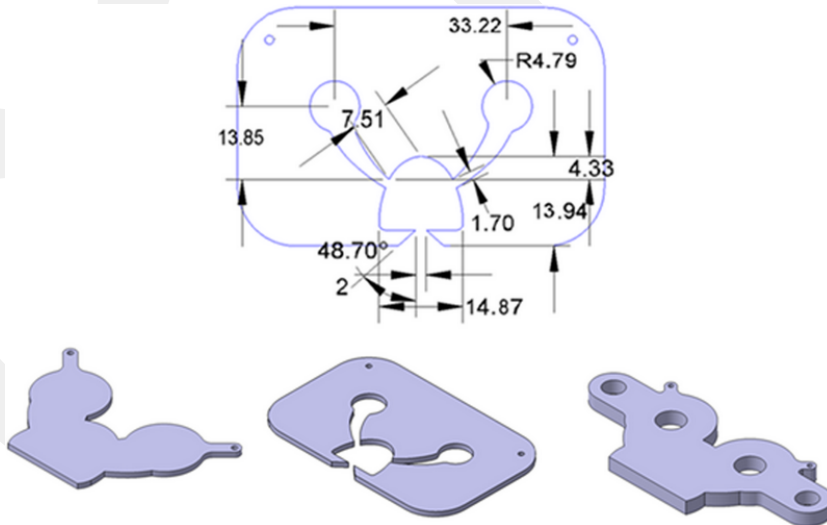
Dimensions of the fluidic oscillator in millimeters (depth is 1.5 mm) and (bottom) the isometric view of the three parts.
